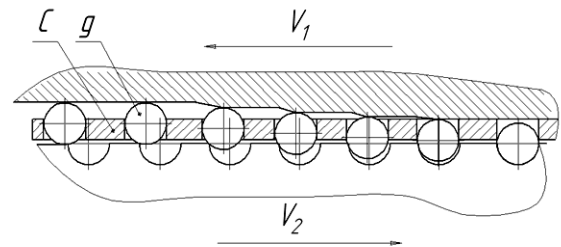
The tooth-cam mechanism with the pusher as intermediate solid of revolution
